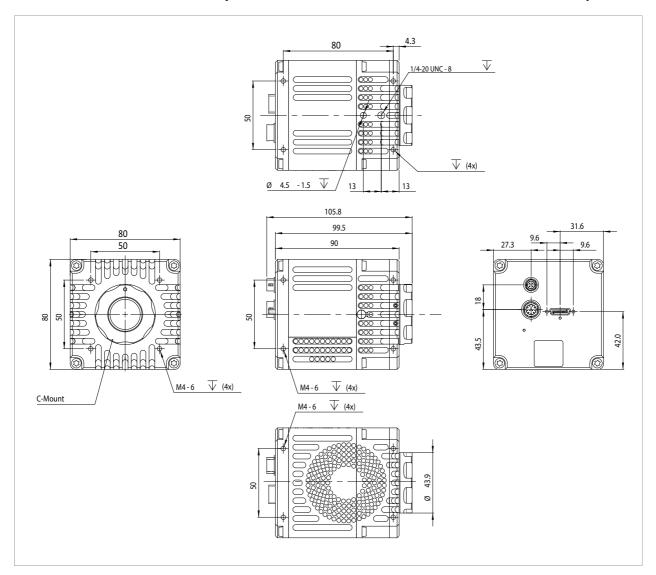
Goldeye CL, Cool model, dimensions with C-Mount lens adapter
